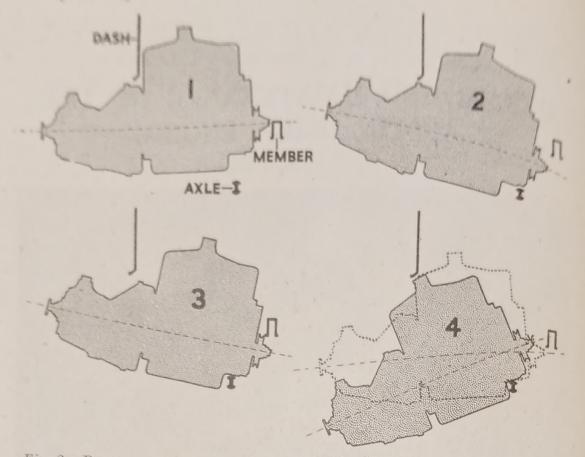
Removal of the rubber-mounted "Ten" engine involves careful Manœuvring
